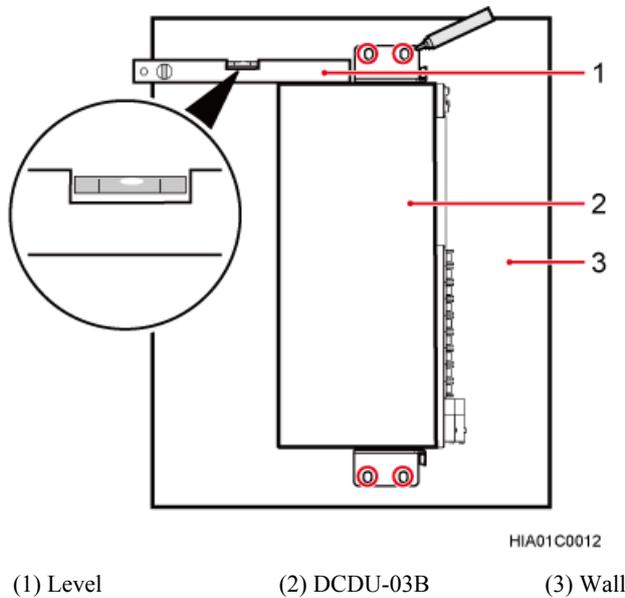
Securing wall-mounting ears for the DCDU-03B on the mounting ears for the DCDU-03B
